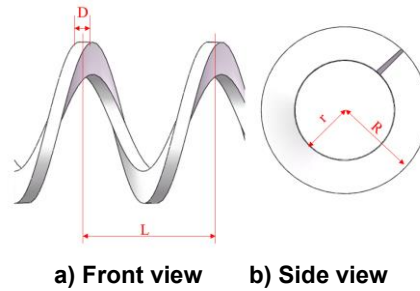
Schematic Diagram of Shaftless Screw Blade Structure
